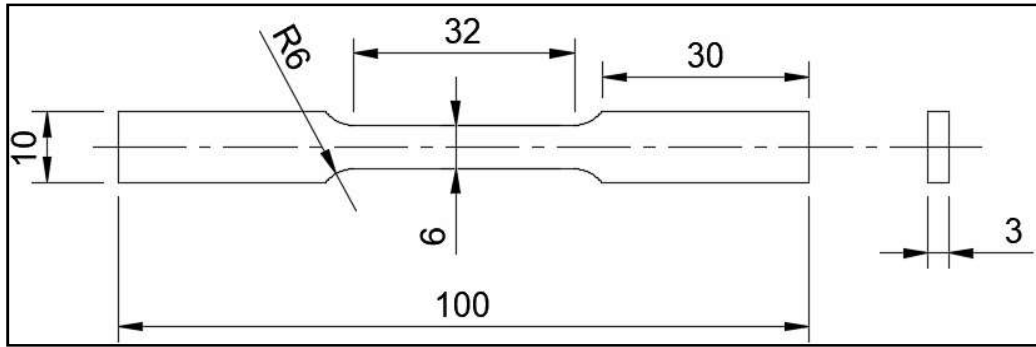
Tensile Specimen as per ASTM E8 standard (all dimensions are in mm)
